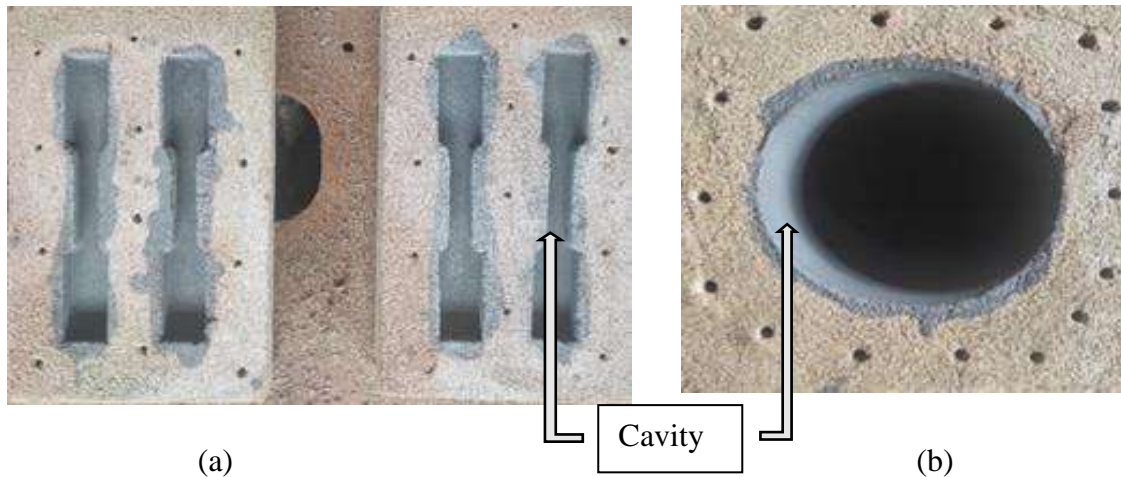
(a) Mould Preparation by sand casting process for tensile test, (b) Mould Preparation by sand casting process for machining performance.
